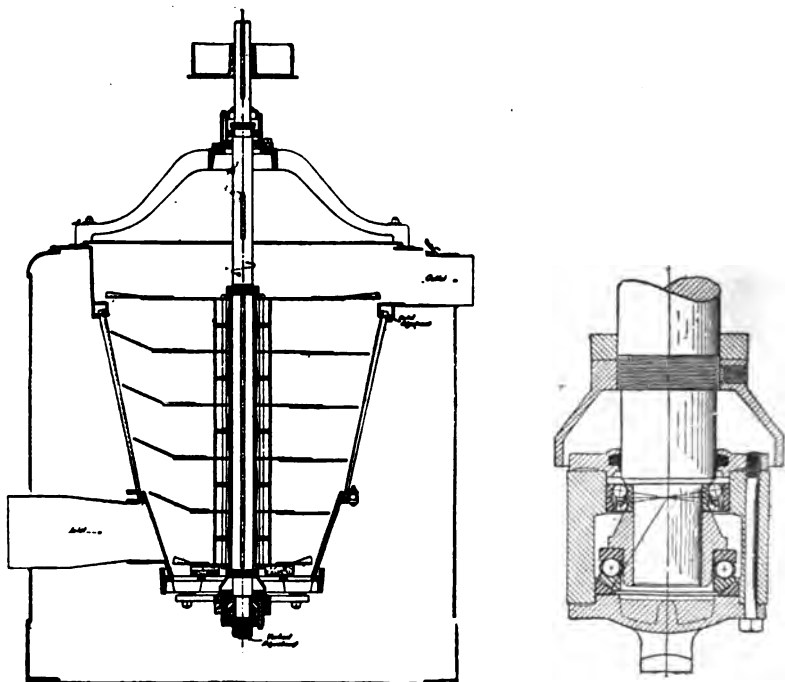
SEC. 10rr.—Sectional view of vertical opener, showing S. K. F. ball-bearings.
